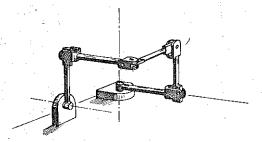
Franke's "Wirbelkette" six-link mechanism
